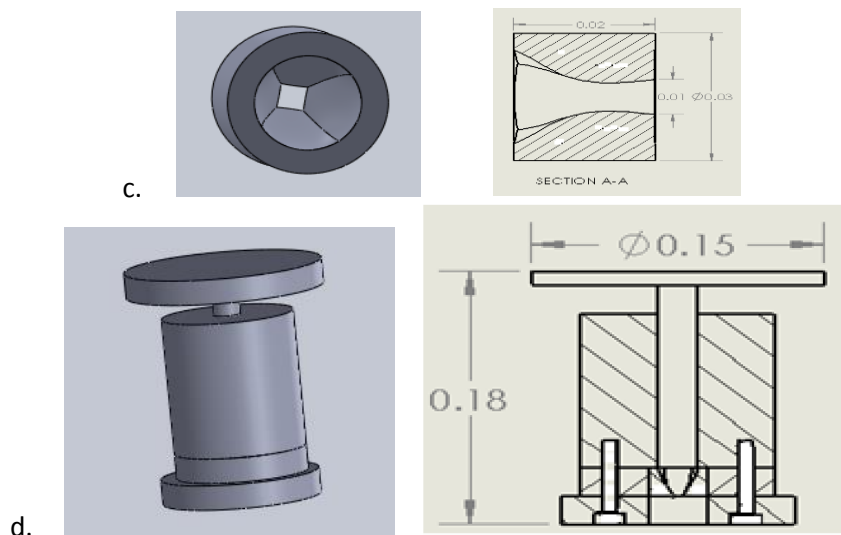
10 c) Cosine dies 3D and 2D section view and d) 3D assembly and 2D sectionsl drawing
